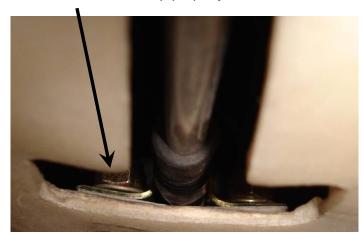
Clamp Installations (Elevator & Aileron) (all J-Series)
